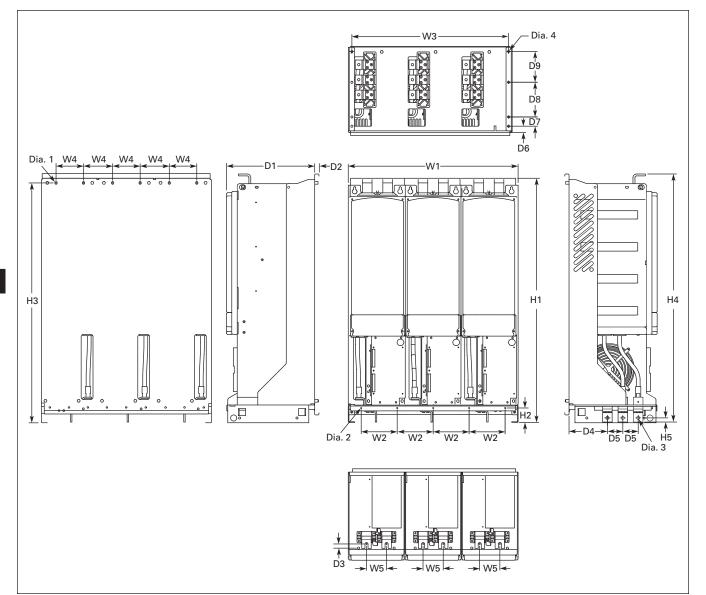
SPX9000 Dimensions, FR13 Open Chassis Converter — 900/1000 hp 480V
